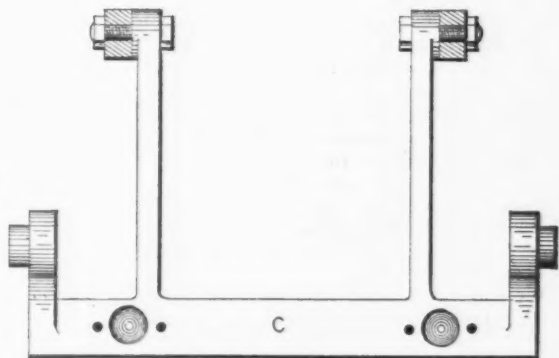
Plan View of Swinging Frame that Draws Down the Pressure Plate.
